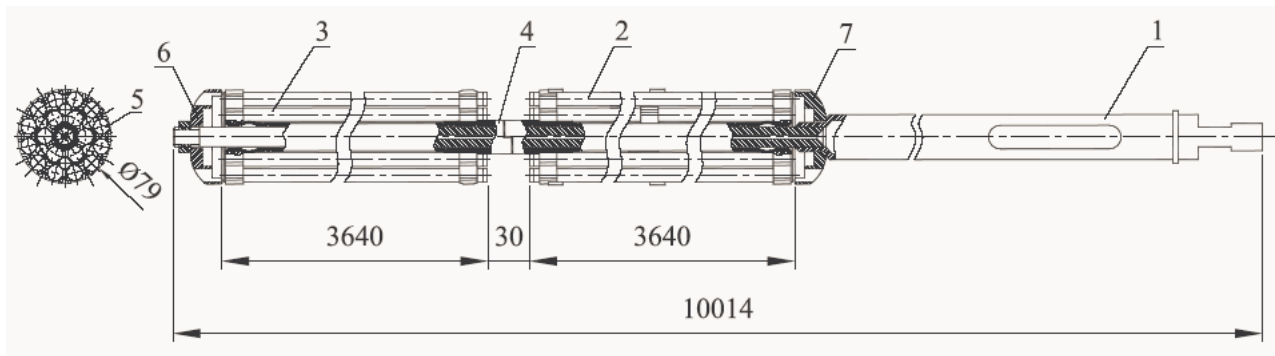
Scheme of the RBMK-1500 fuel assembly: 1 – extension rod, 2 – upper bundle, 3 – lower bundle, 4 – carrier tube/rod, 5 – heat-emitting element, 6 – lower cap, 7 – upper cap.
